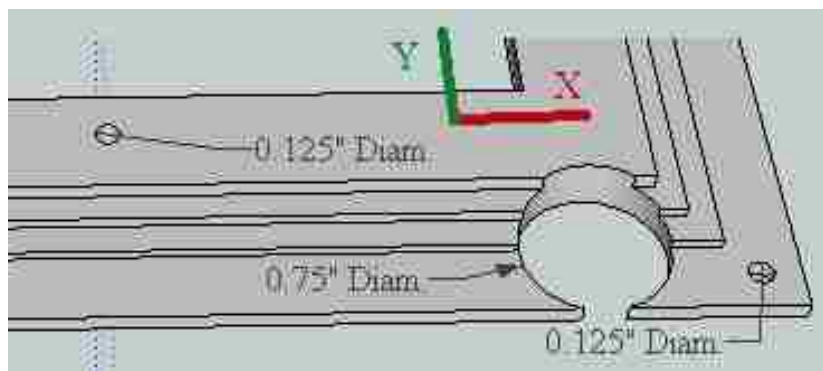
Orthogonal view of the 10x10 cm² middle trimmer lead plate illustrating hole dimensions.
